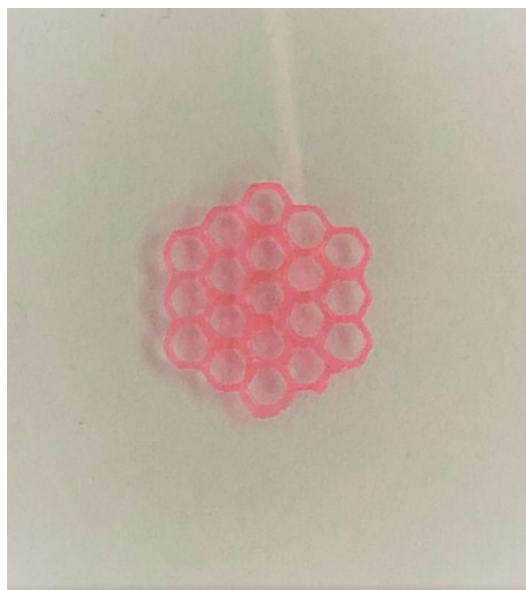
Photograph of the 2mm dimension honeycomb-like structure.
